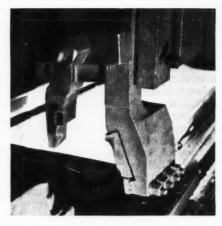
Double tool setup for remachining angle bars. With these tools 104 hard steel angle bars have been remachined in eight hours.
